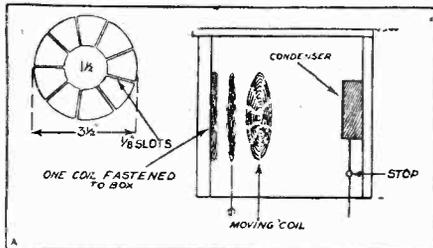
showing the cardboard coil former and the arrangement of the tuning coils.
